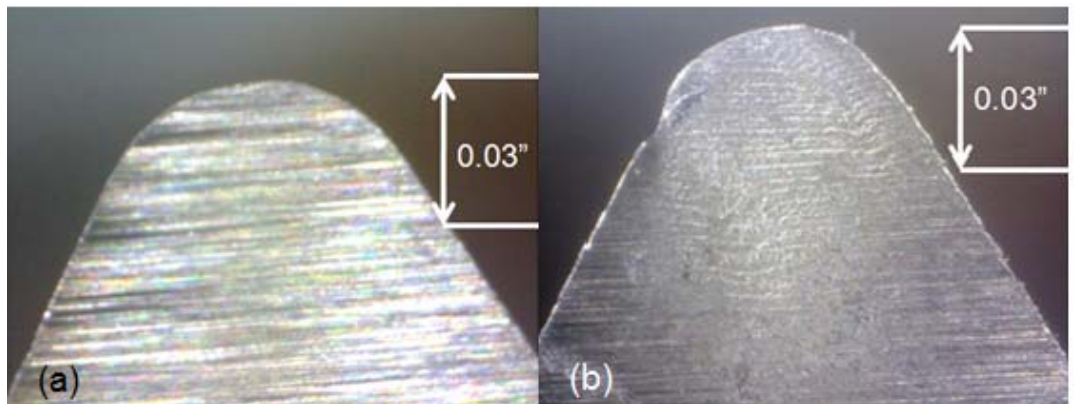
Chip Breaking Cut, 2.5 R_{af} (a) Original Insert (b) Worn Insert
